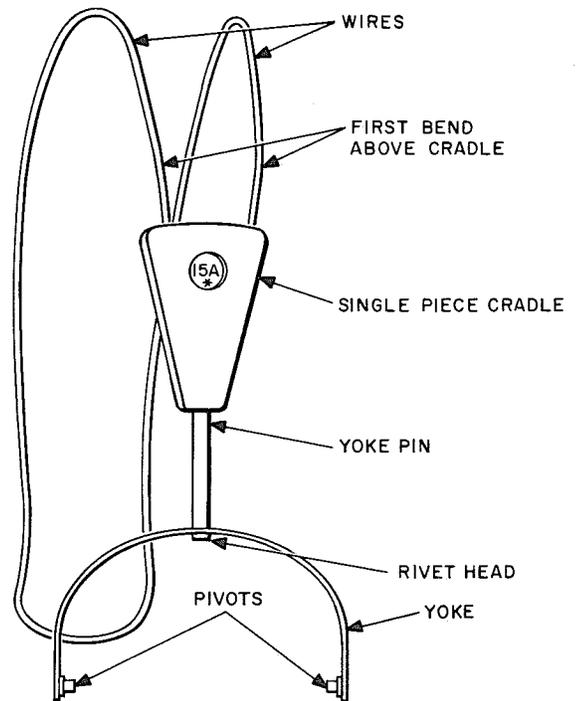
B — Later Method of Riveting Yoke Pin To Yoke
